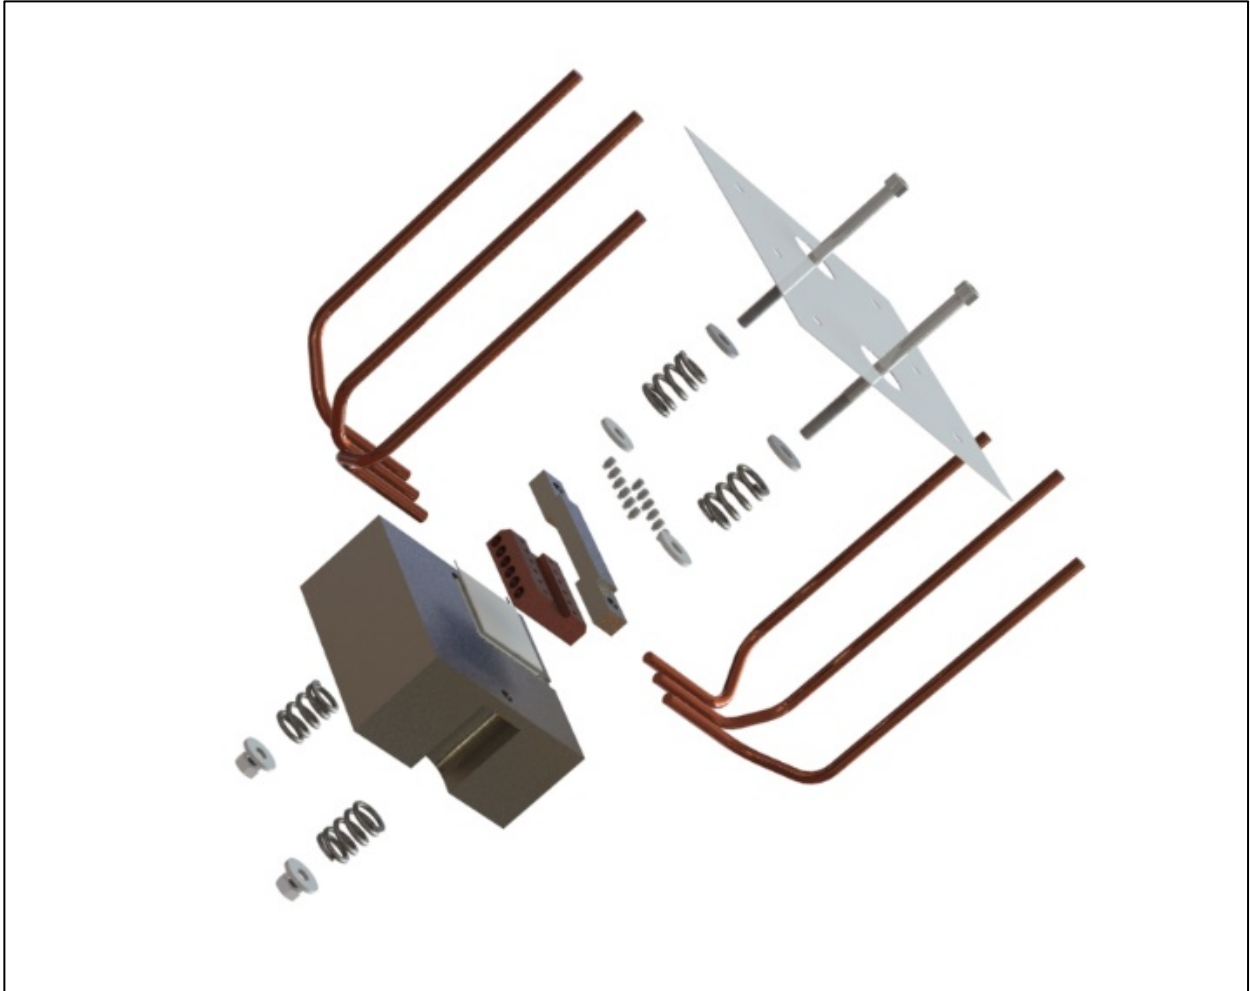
Full assembly exploded view. Full heatsink array omitted for clarity.
